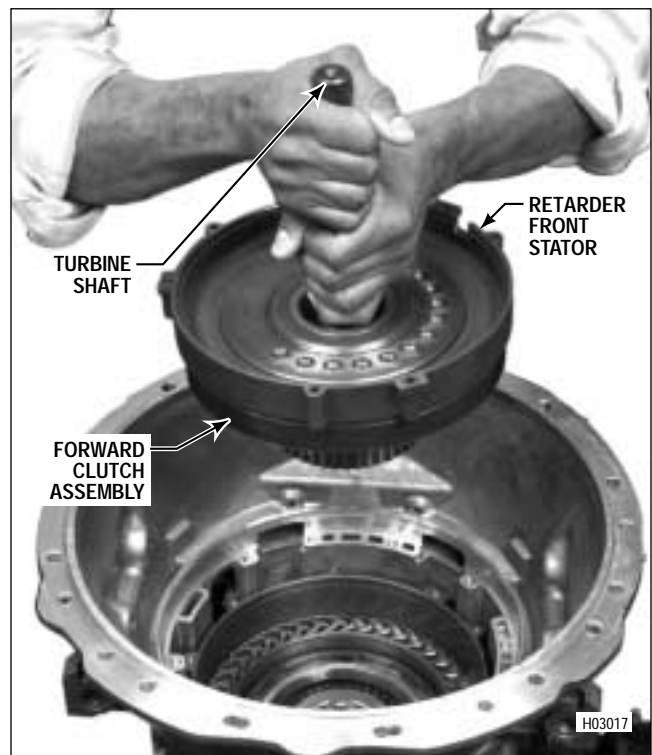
Removing Forward Clutch and Turbine Shaft Assembly and Front Stator (Models With Retarder)
